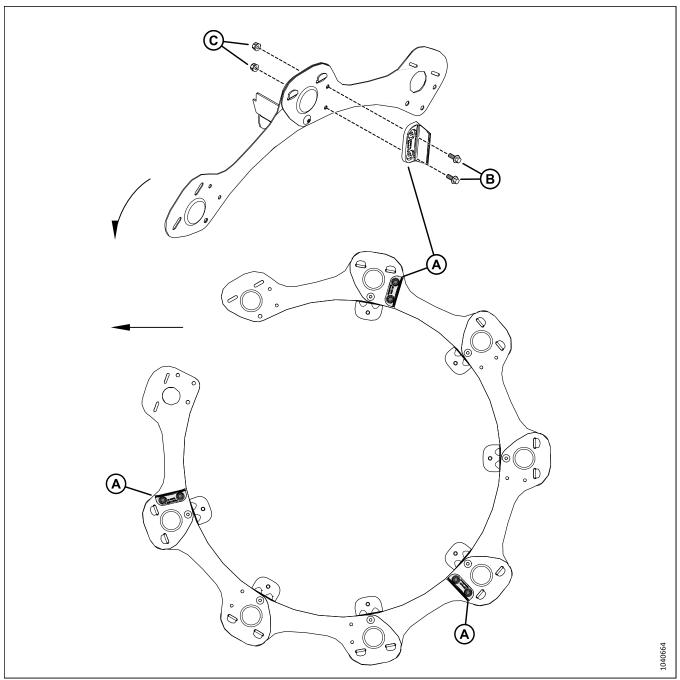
Nine-Bat Reel – Initial Endshield Assembly
